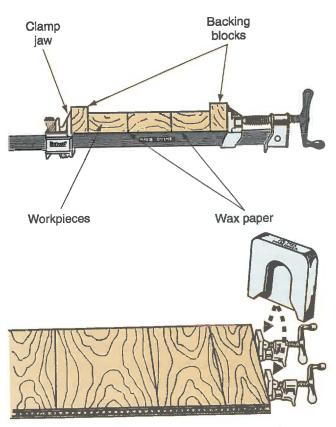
Backing blocks and clamp pads protect your product from damage caused by clamp jaws. (*Adjustable Clamp Co.*)
